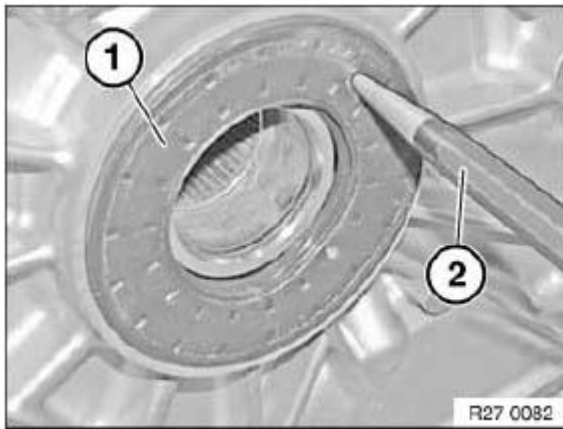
Identifying Radial Shaft Seal And Center Punch
